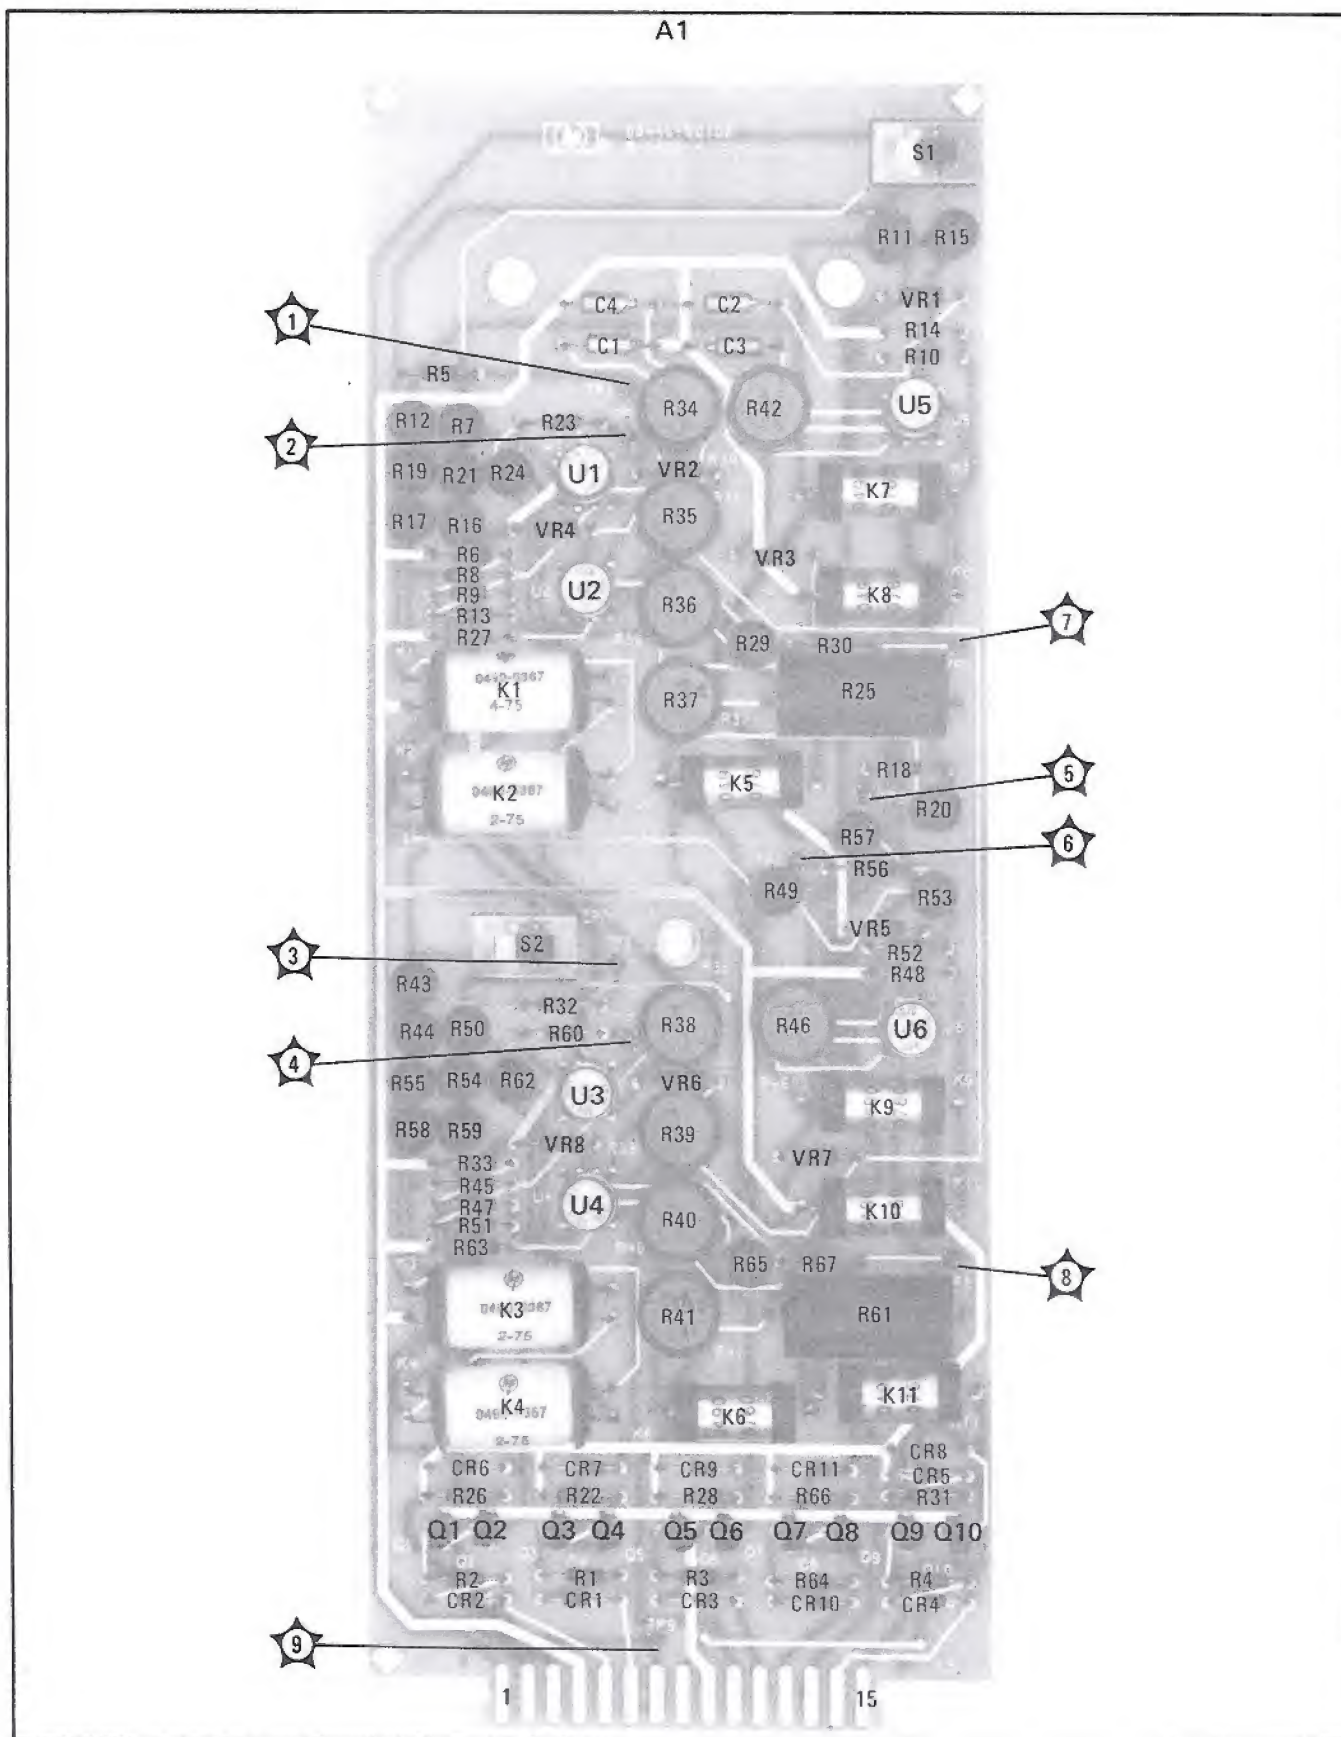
A1 Option 003 YIG/DPM Predriver Assembly Parts Locations
